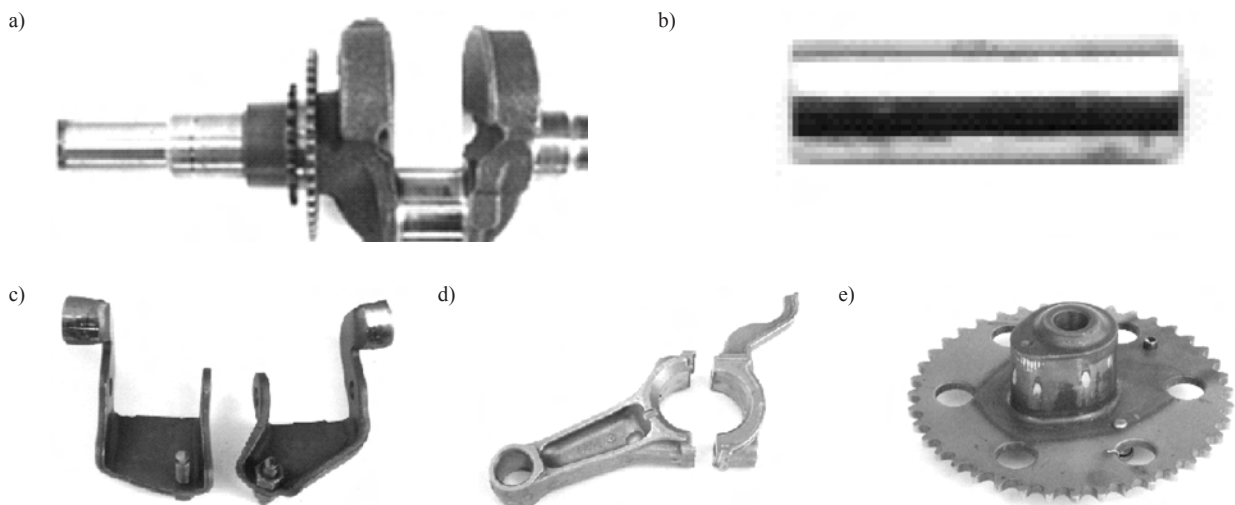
Elements of sliding pairs of combustion engine: a) crankshaft, b) piston pin, c) rocker arms, d) connecting rod, e) camshaft
